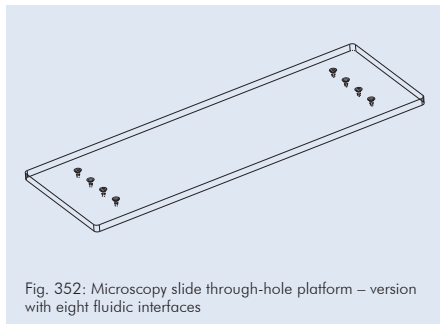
Microscopy slide through-hole platform – version with eight fluidic interfaces
